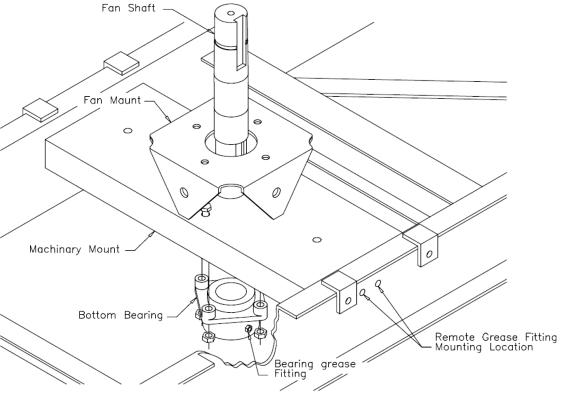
BOTTOM BEARING AND FAN SHAFT
